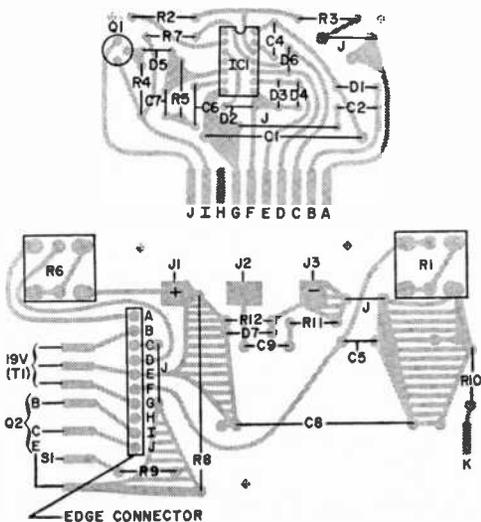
Completed boards should look like these. The two dual potentiometers mount big board to chassis front.
